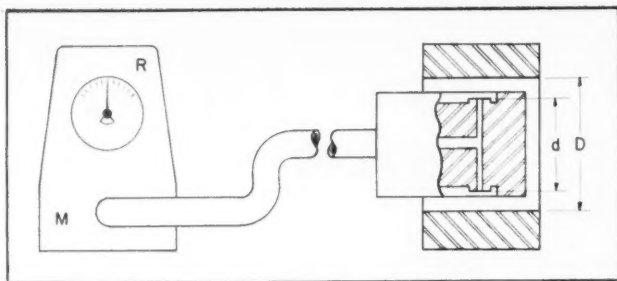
Cross-sectional view showing detail of plug jet and workpiece.
